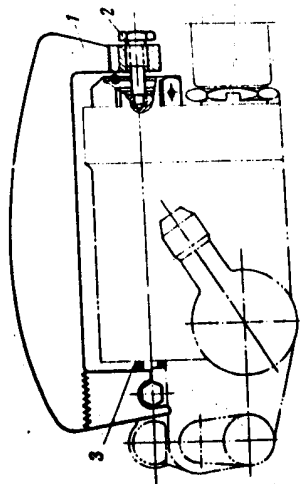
Fixture for Checking Operation of EY-13M Hydraulic Booster Duplicate Slide Valve
